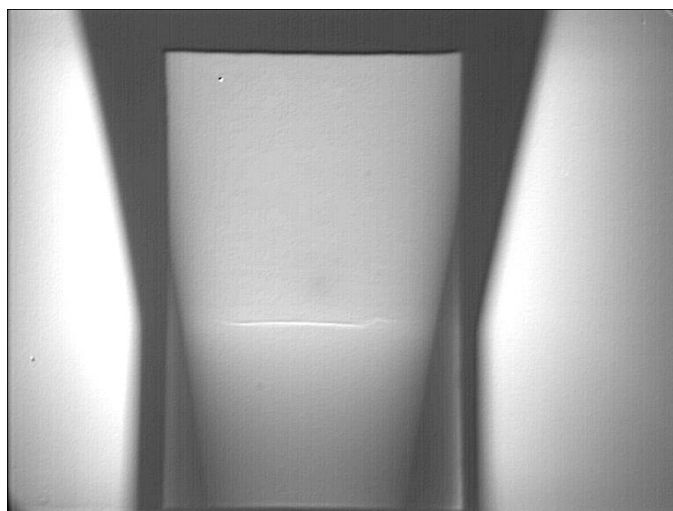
High explosive material dusted around the firing channel in the body of RGM type fuse
